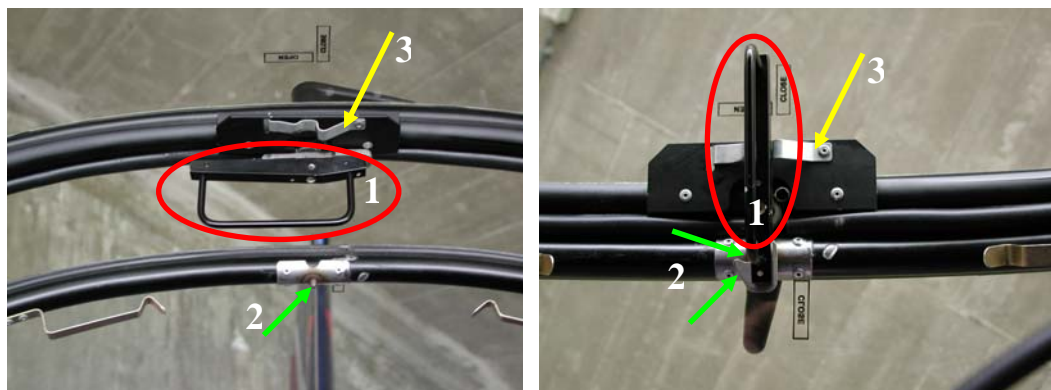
and 6: 1) Locking handle. 2) Locking tab and hook. 3) Spring blade
